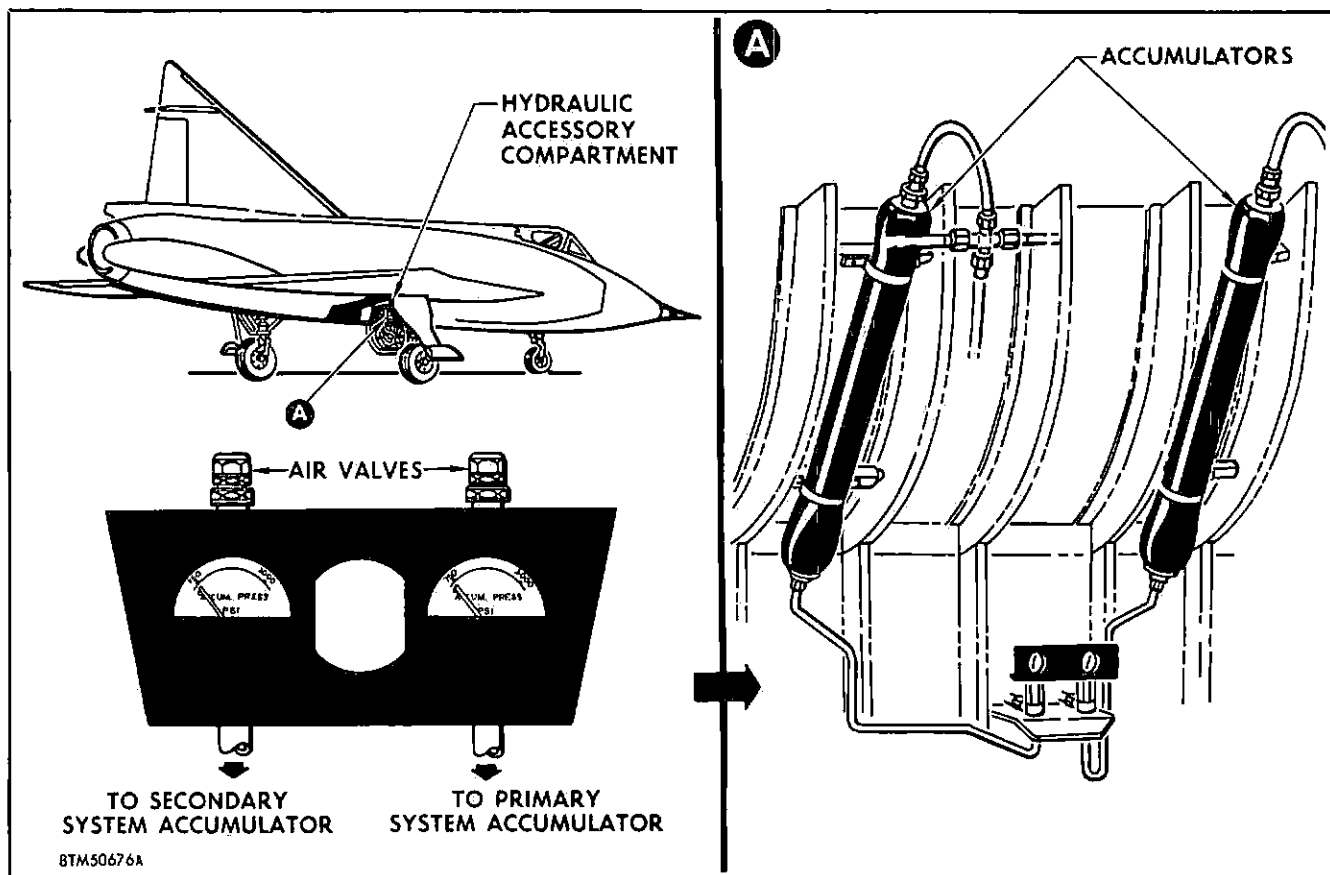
Hydraulic Accumulator Pressure Indicator
